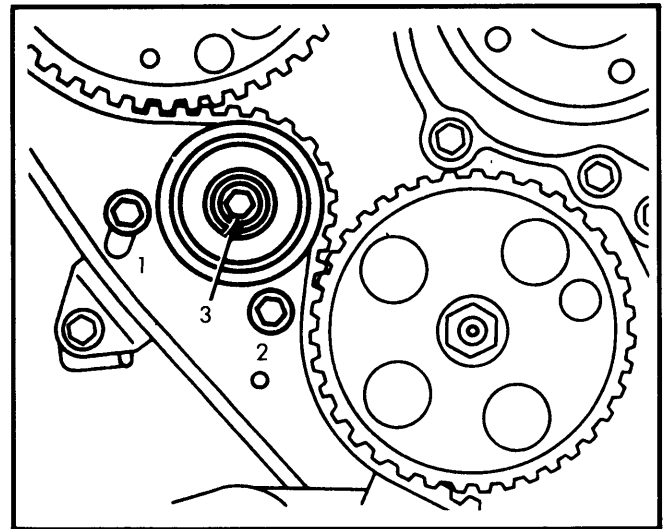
Tensioner Pulley Bolt Tightening Sequence
